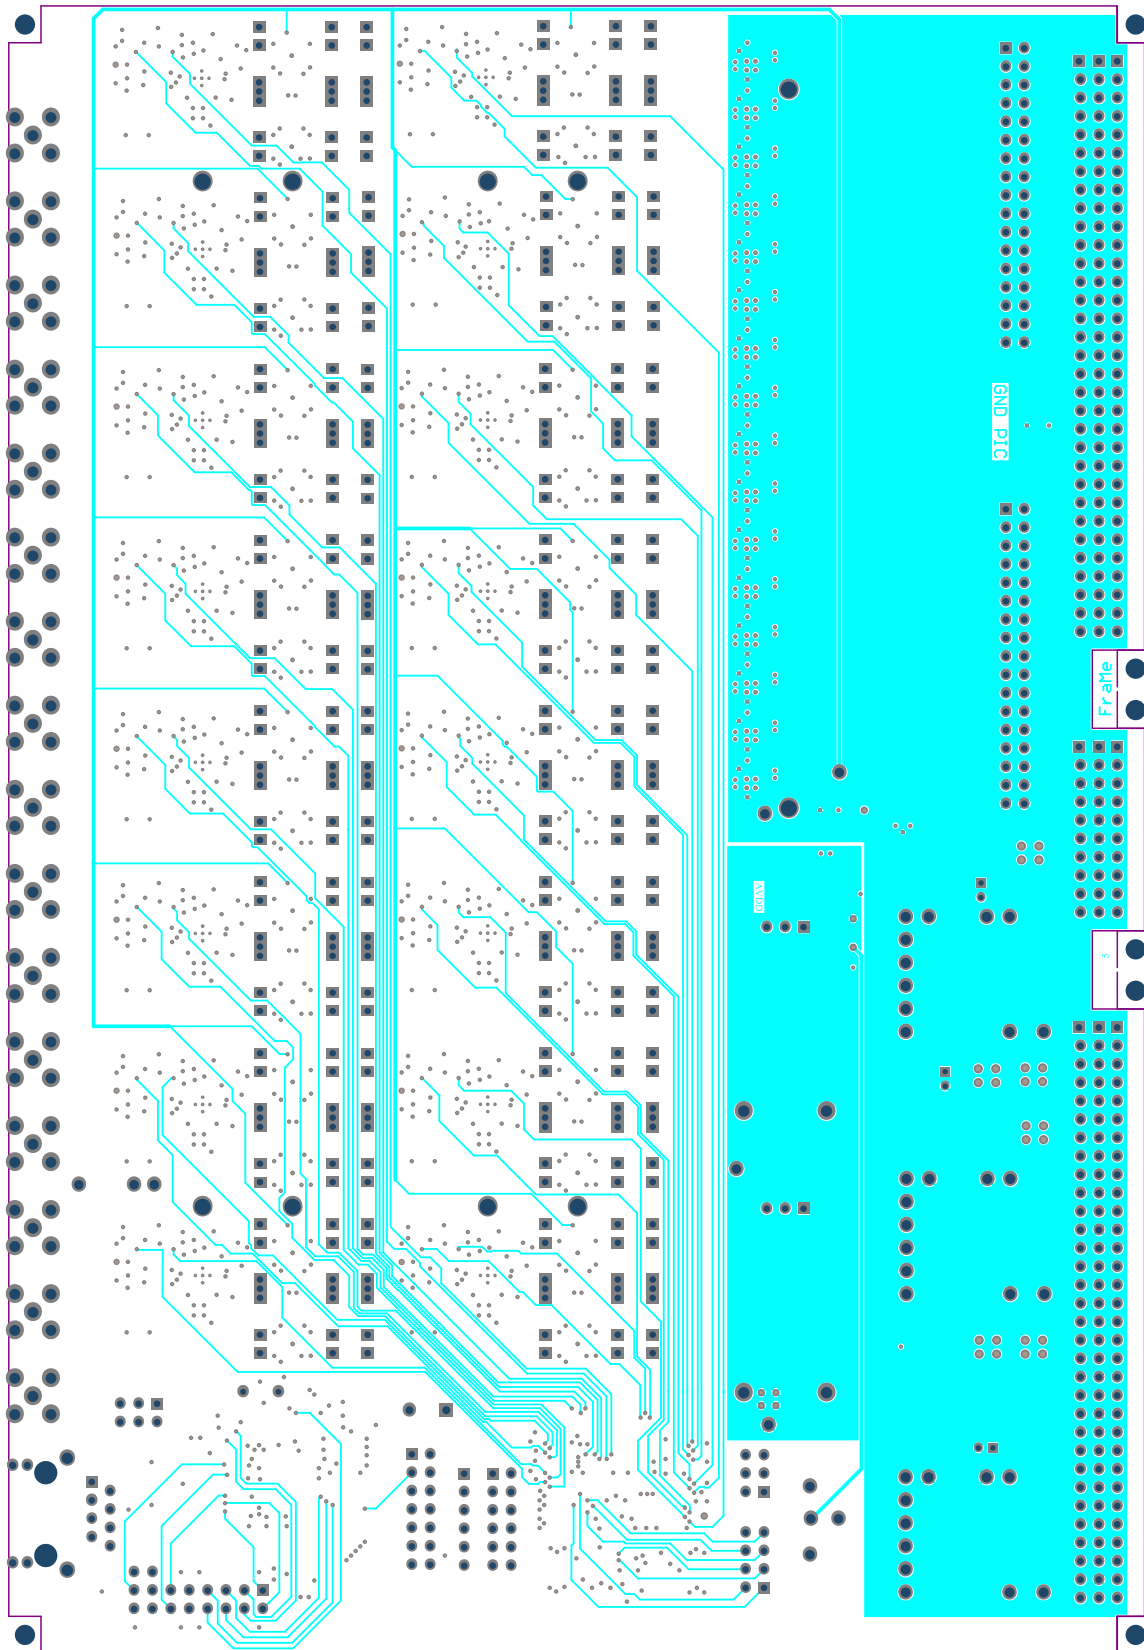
Drawings of the B-FrED PCB layers: thresholds
